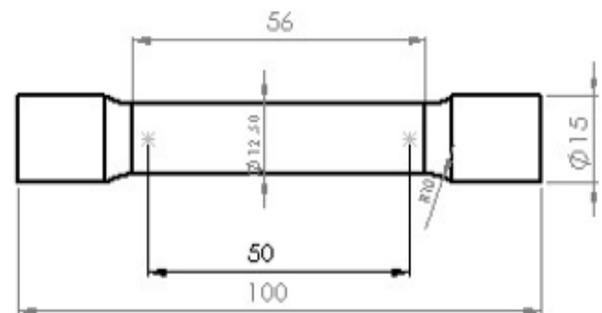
Dimension of the tensile testing specimen (all dimensions in mm)
